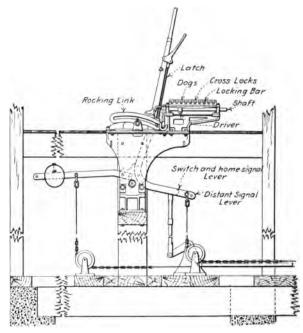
Saxby and Farmer's Interlocking Machine.
